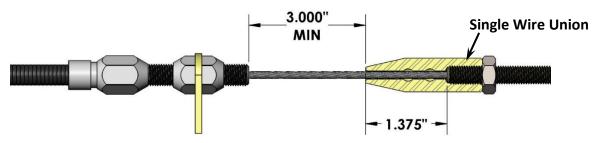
Inner Wire Minimum Clearance Length (Cross Section View)
